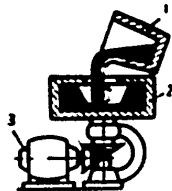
Scheme of Centrifugal Casting with a Vertical Axis of Rotation of the Mold; 1) Ladle; 2) Rotating Mold; 3) Electric Motor.
